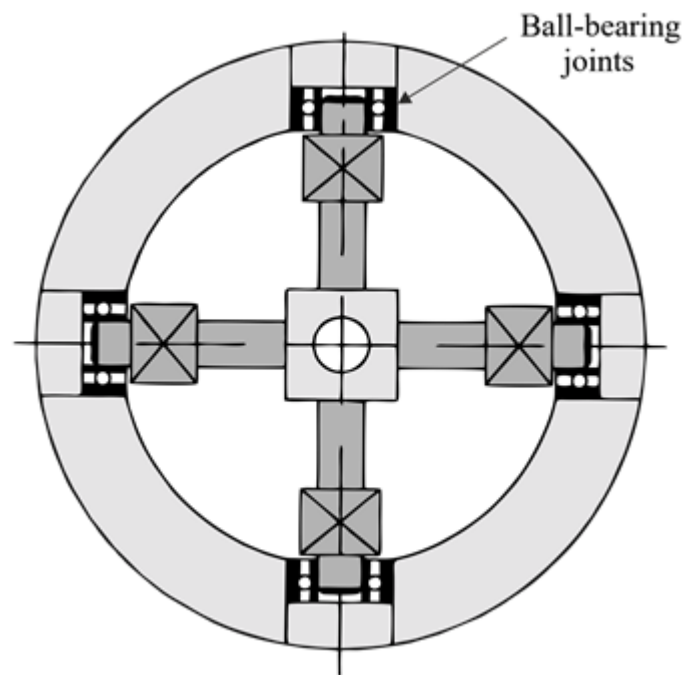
Six DOF cross-beam design proposed in [38] employing ball-bearings at the frame-beam joints
